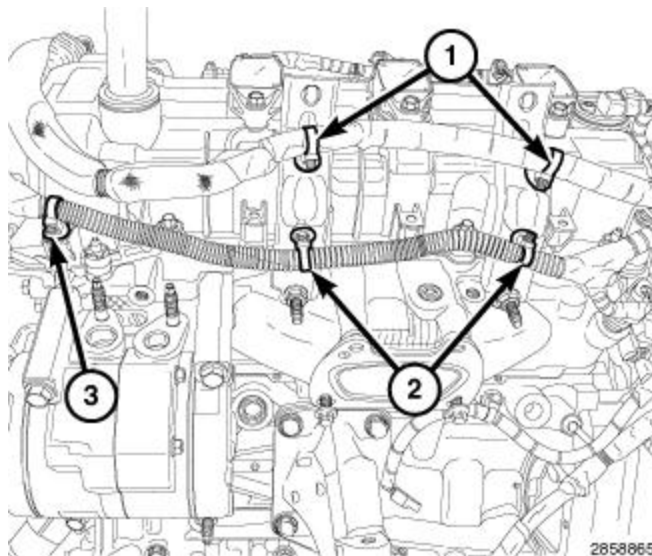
Starter Wire Harness Retainers, Main Wire Harness Retainer & Manifold Support Bracket Retainers
